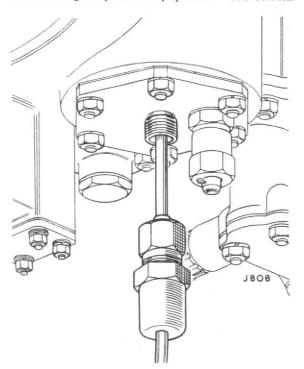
Oil temperature bulb being inserted into pocket in oil pressure filter.
